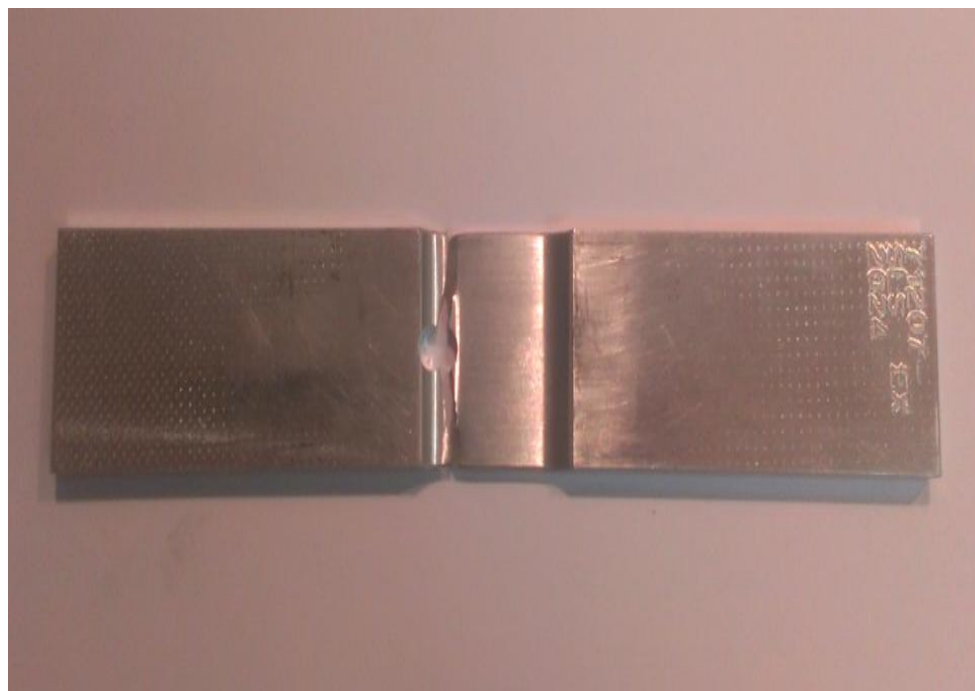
Open Hole in Radius Test Specimen -6 Post-Test Picture
